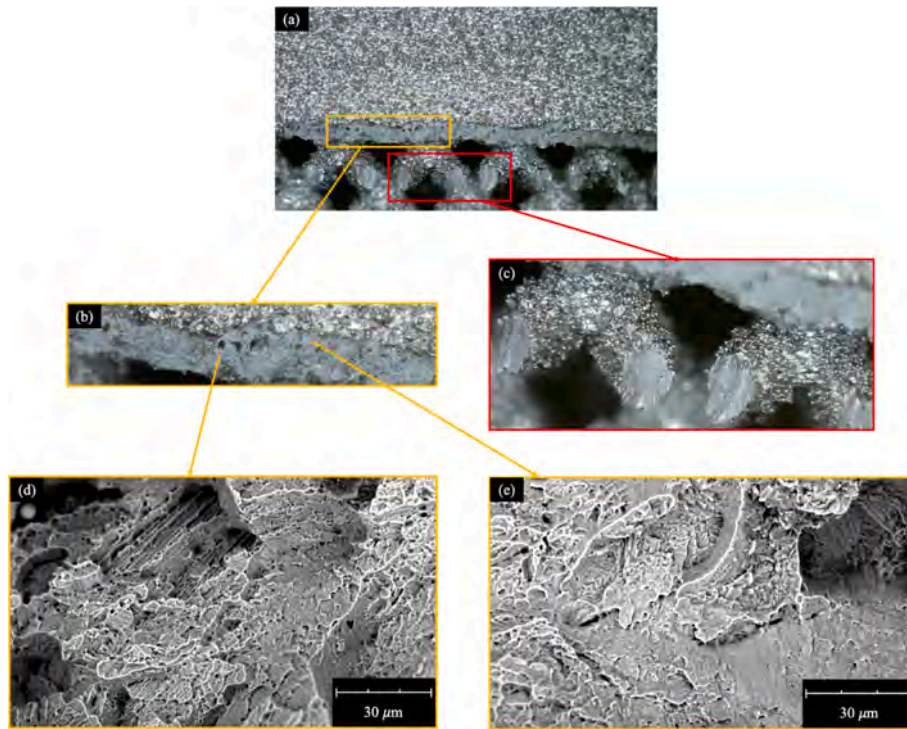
Fractography analysis of C2-R0.30 sample after three-point bending tests. (a) macroscopic images of the fractured lattice sandwich panels; (b) detail of the fracture surface in correspondence with the skin; (c) detail of the fracture surface in correspondence with the struts; (d) end (e) SEM analysis of the skin area, where dimples and cleavage surfaces can be observed.
